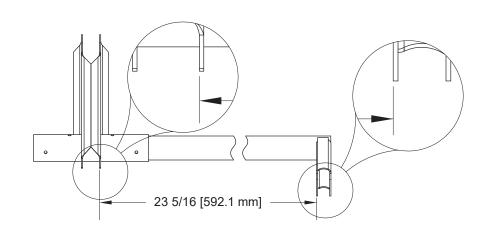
DISTANCE FLAP CRANK TO TORQUE ARM
